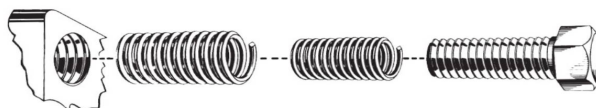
Assembly of Twinsert-Helical insert-Bolt
